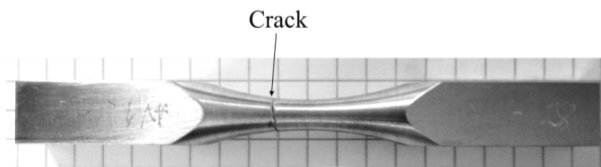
A-V1 specimen showing that the fatigue crack is not necessarily located in the center of the specimen
